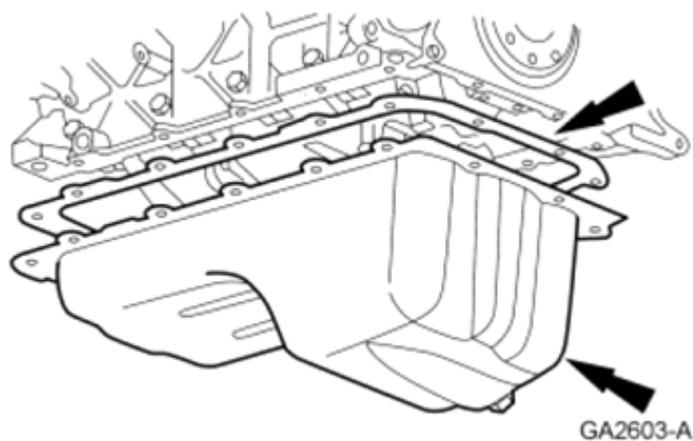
Locating Oil Pan Gasket And Oil Pan Bolts
